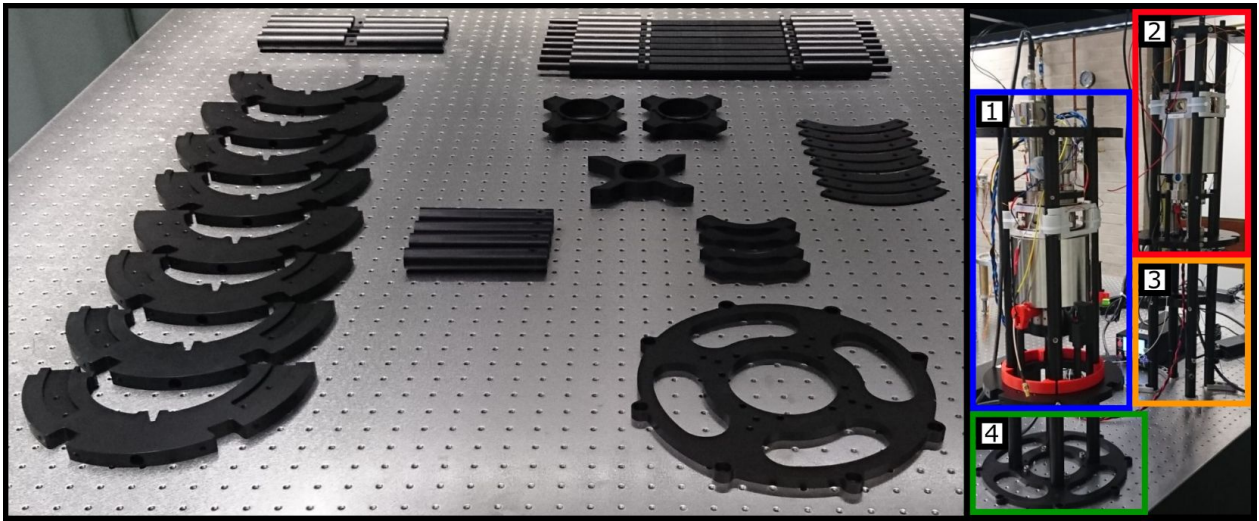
Left: The forty piece mounting structure before assembly. Right: The four modules the sensor package can be easily broken down into after assembly.
